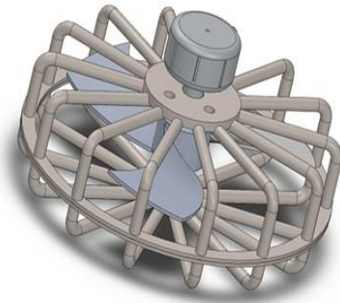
Solidworks Drawing of 5V DC Brushless Cooling Fan Assembly
